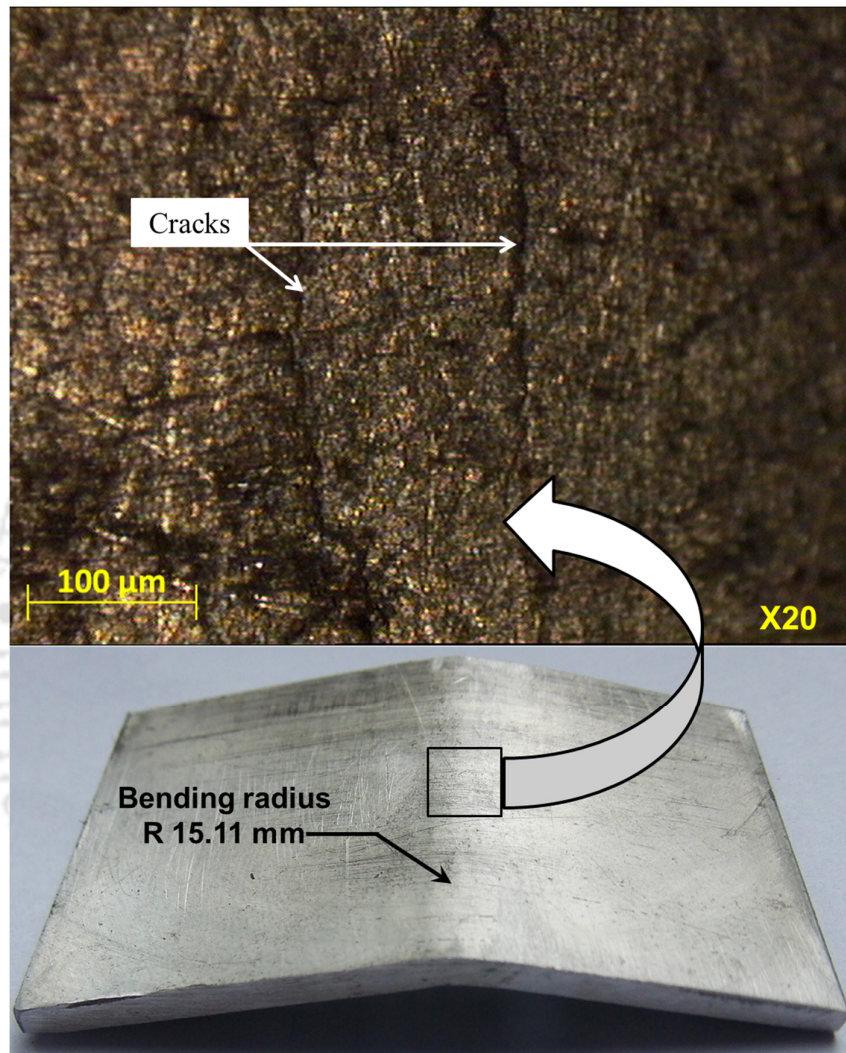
Optical microscope image showing cracks generated at the bottom surface during mechanical bending of magnesium alloy M1A sheet.
